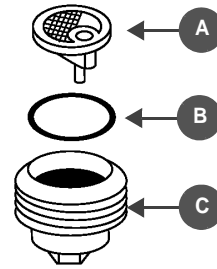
Fuel Sediment Cup Assembly Pieces
